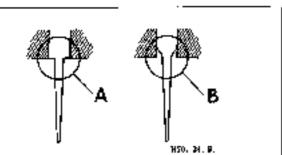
Showing the two forms of tapezed needle A. Signare shoulder. B. Tapered shoulder.
